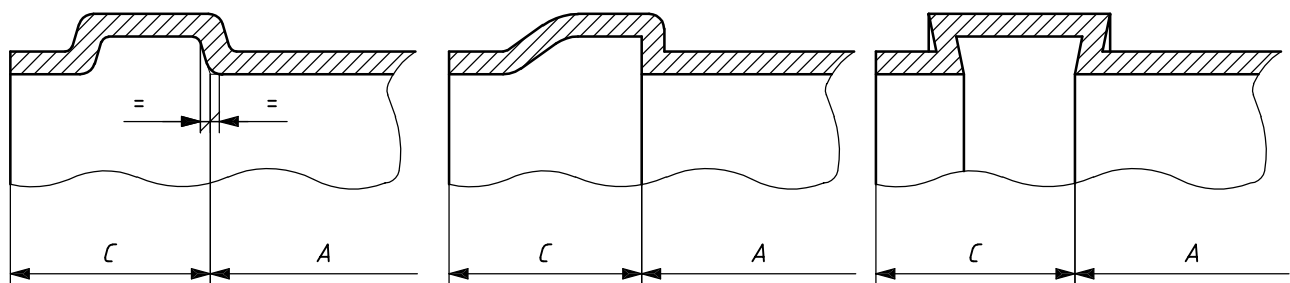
Typical groove designs for elastomeric ring seal sockets
